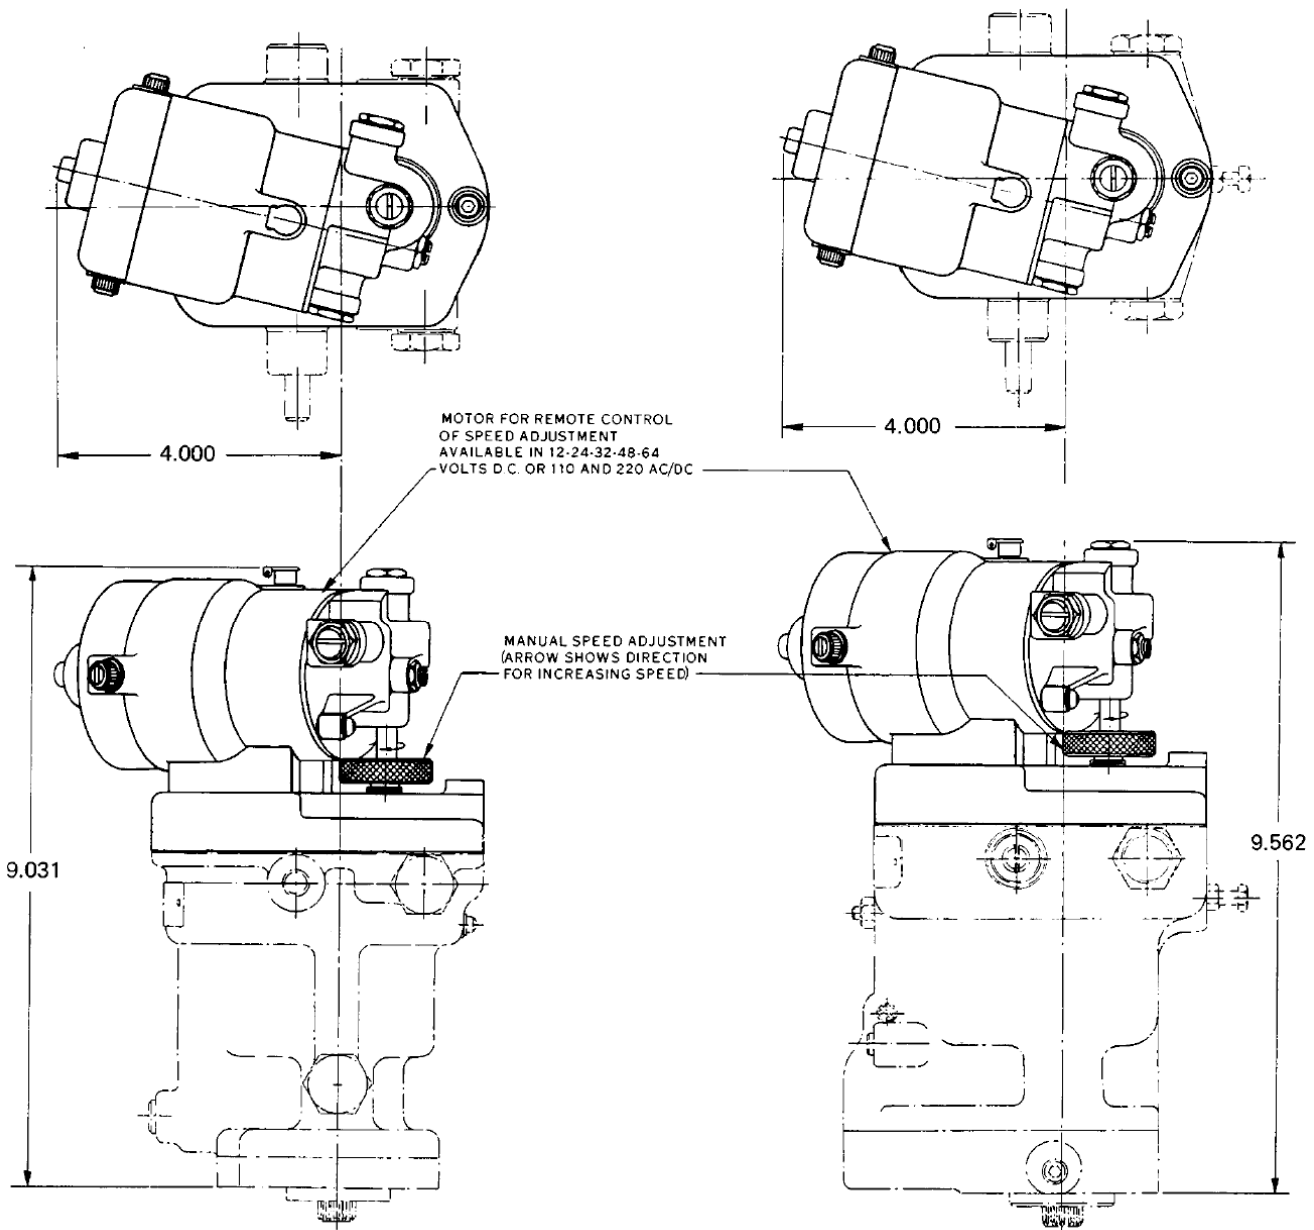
SG Governor Outline with Speed Adjusting Motor Cover Assembly
